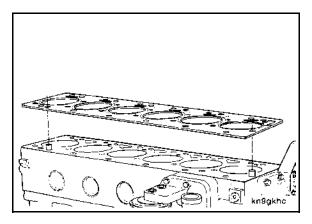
POSITION THE NEW CYLINDER HEAD GASKET OVER THE DOWELS
